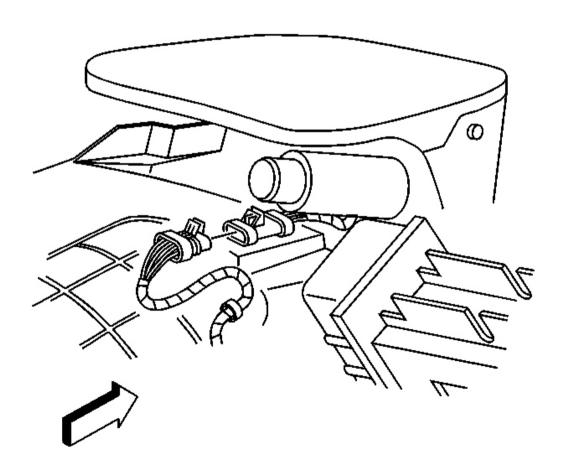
RH Headlamp Wiring Harness Electrical Connector To Forward Lamp Wiring Harness Courtesy of GENERAL MOTORS CORP.
